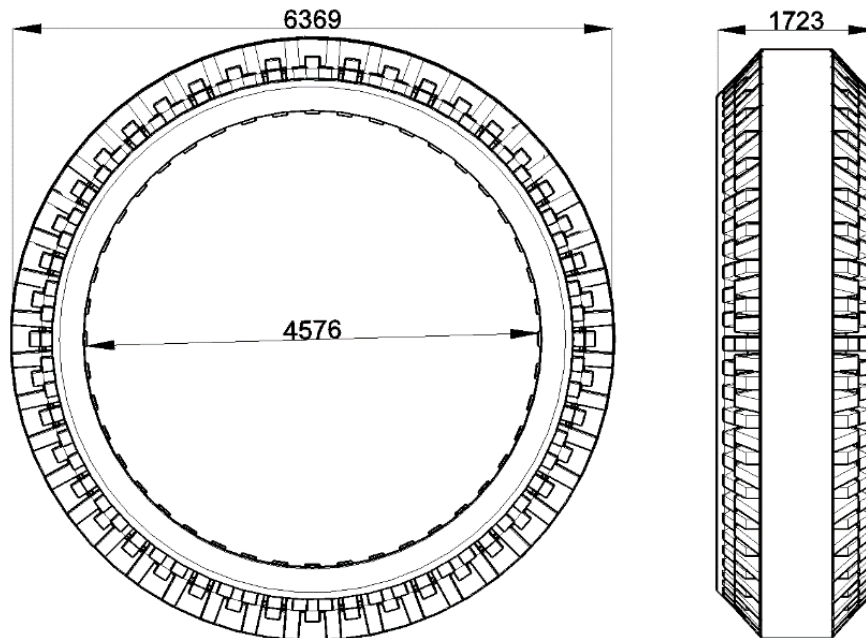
11.7 MW design dimensions of the double claw pole generator with an angled stator.
